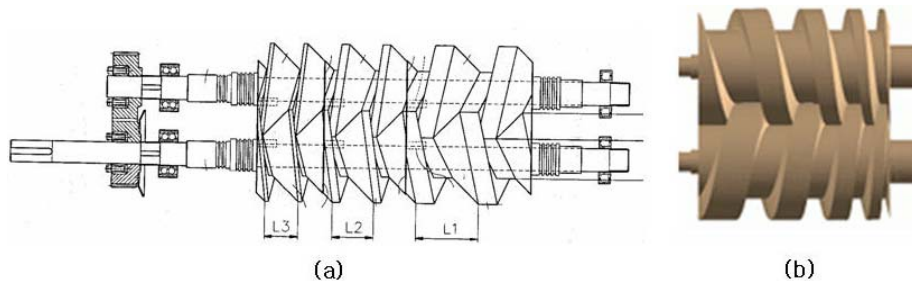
Screw design for introducing built-in volume compression in single-stage dry vacuum pump, (a) Discrete screw pitch, (b) Continuous screw pitch
